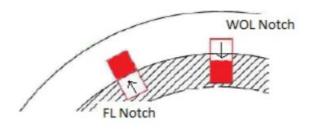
Orientation of CTOD specimens sets at FL and Weld overlay.
